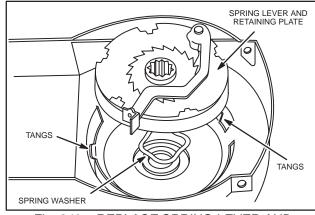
REPLACE SPRING LEVER AND RETAINING PLATE
